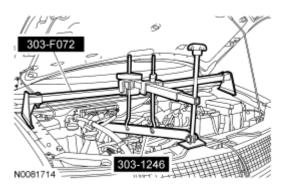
Engine Support Bar & Engine Spreader Bar Courtesy of FORD MOTOR CO.
